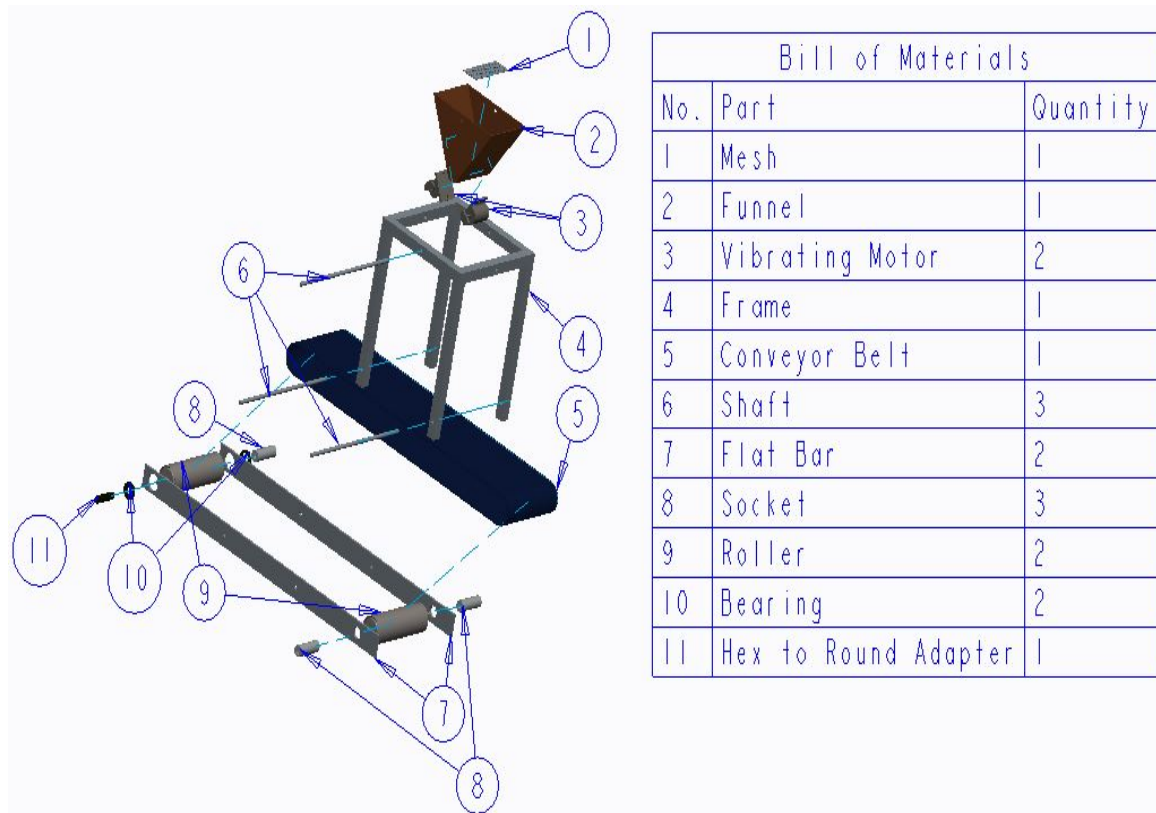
Shows a detailed exploded of the assembled design in Creo. It is featured along side the bill of materials.
